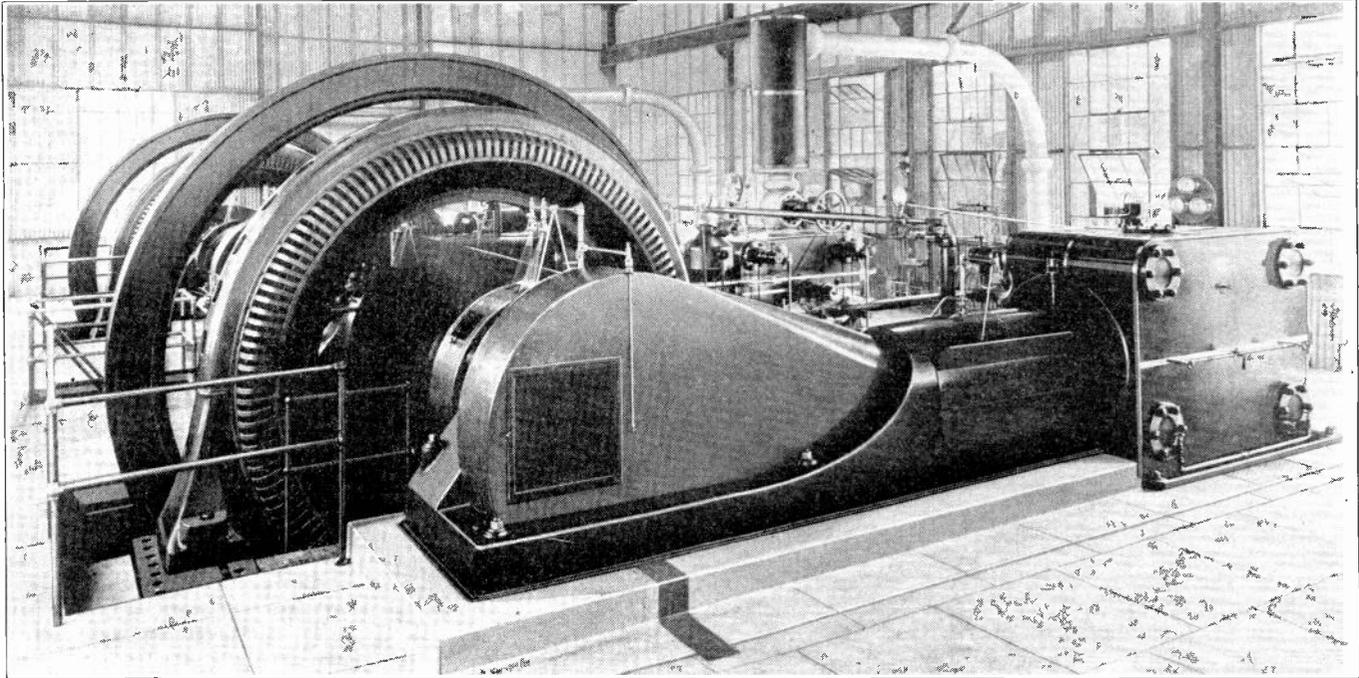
This photo shows a view in a power plant equipped with horizontal type steam-engine-driven alternators. These alternators are made with large diameters because of the relatively low speed at which they are driven. (Photo Courtesy Allis Chalmers Mfg. Co.)
